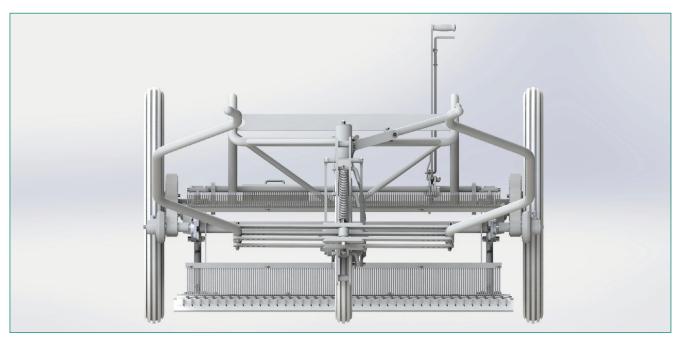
Front view of the horse drawn CombCut coupled to the forecart
